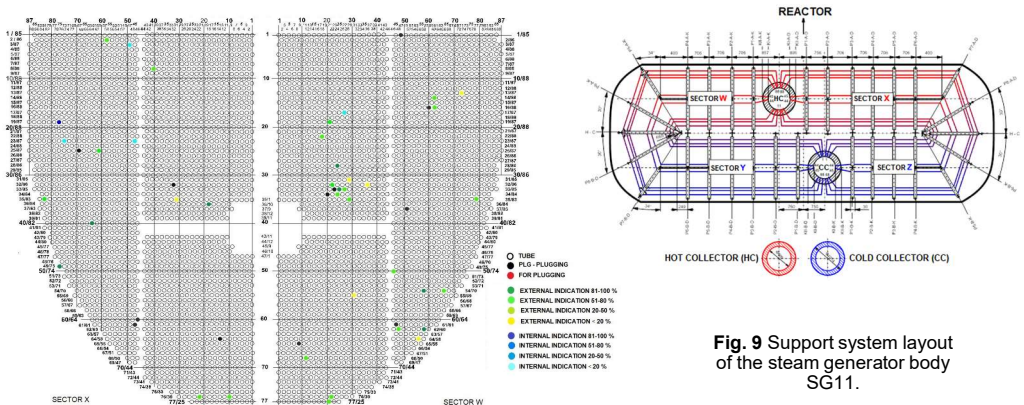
Hot collector tubesheet of the SG11(year 2004).
